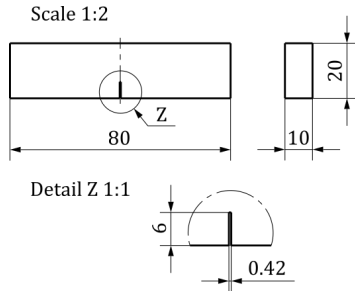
SENB-specimen geometry for fracture mechanical testing
